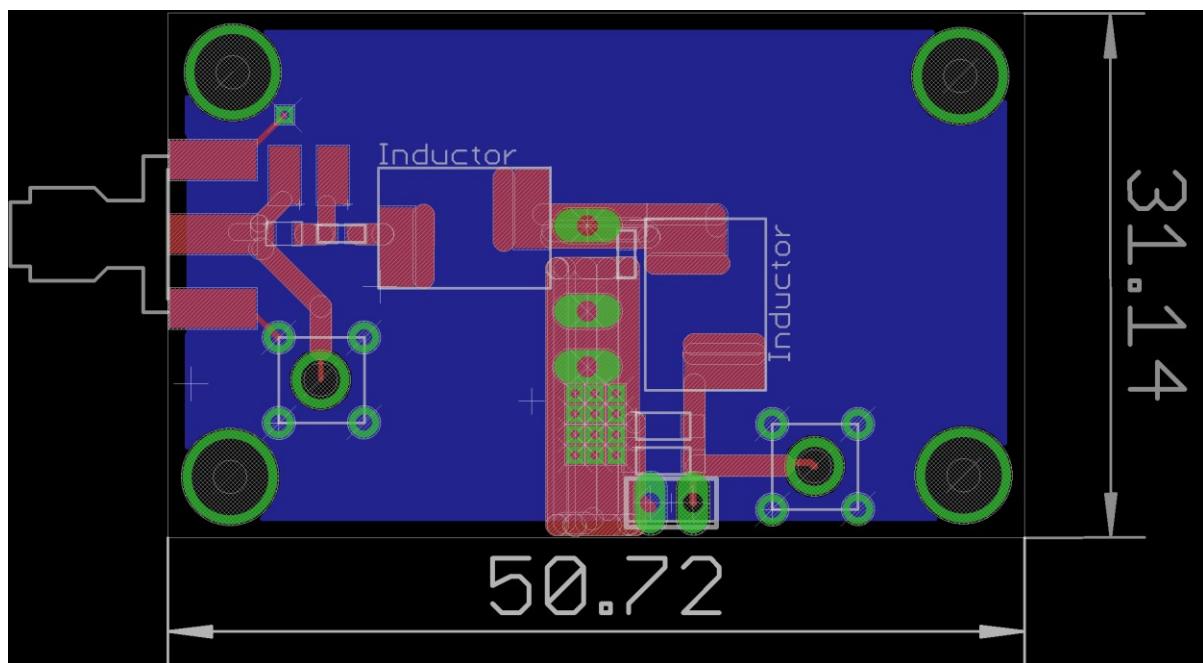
Layout of class E rectifier circuit board for through hole diodes. Referenced in chapter 5.
